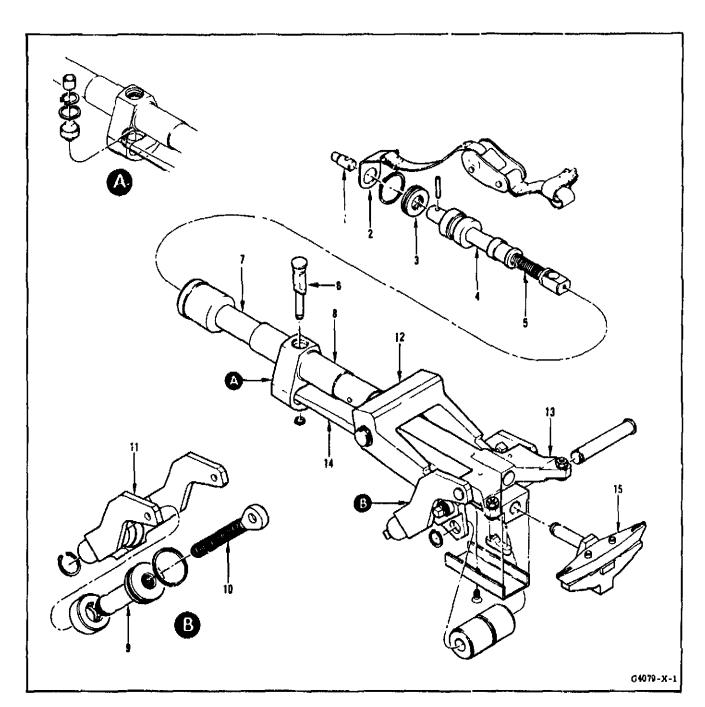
Nozzle Extension Minement Tool (Sheet 1 of 2)
